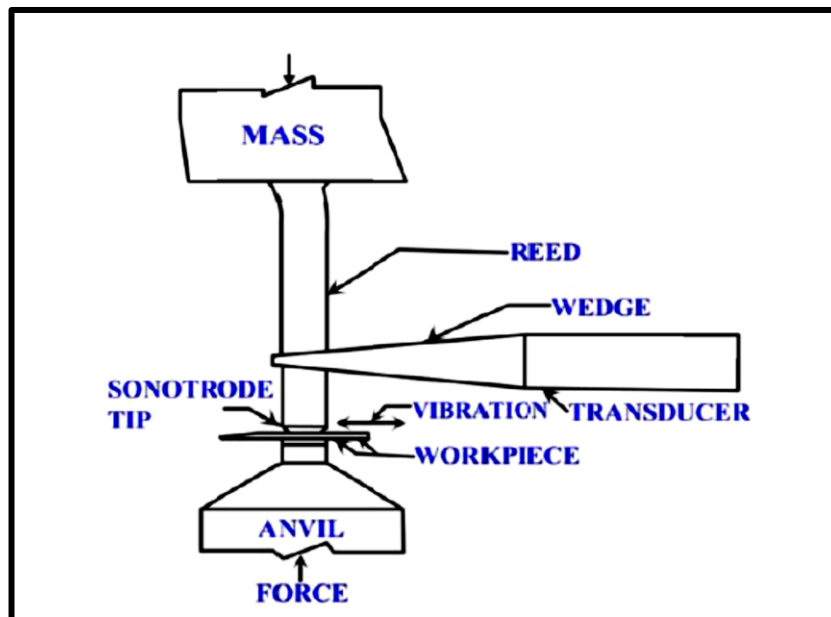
Wedge-Reed Ultrasonic spot Welding system
